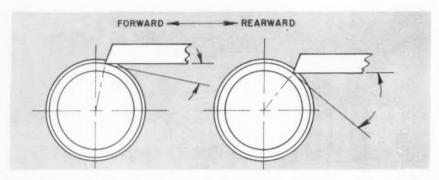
Clearance between the chaser cutting edge and the work is controlled by moving the chaser tangentially—forward for less clearance and rearward for more clearance.
